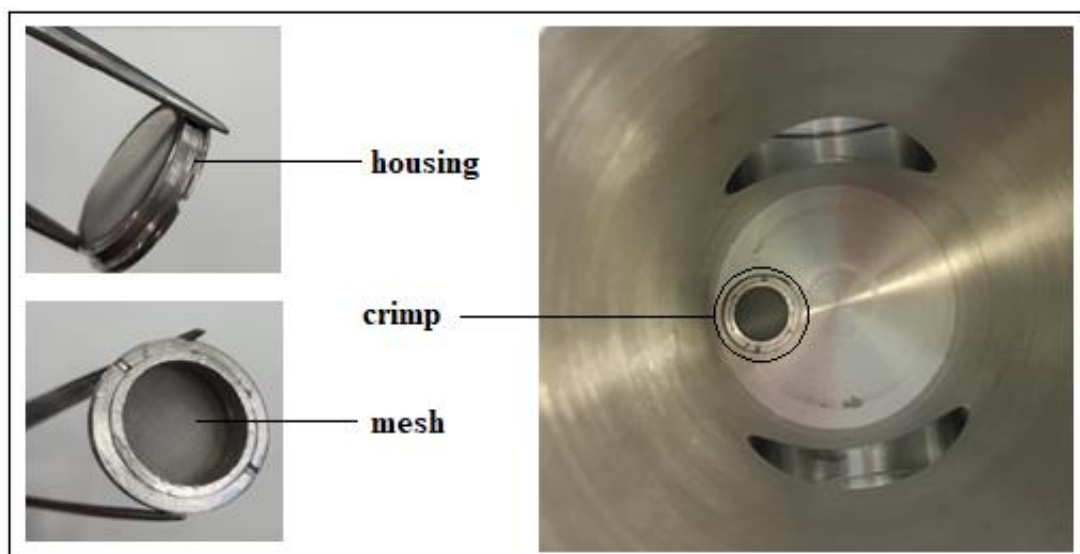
The sampling screen configuration [left]: manufactured crimp and mesh, [right]: the crimp screwed into the bottom flange.
